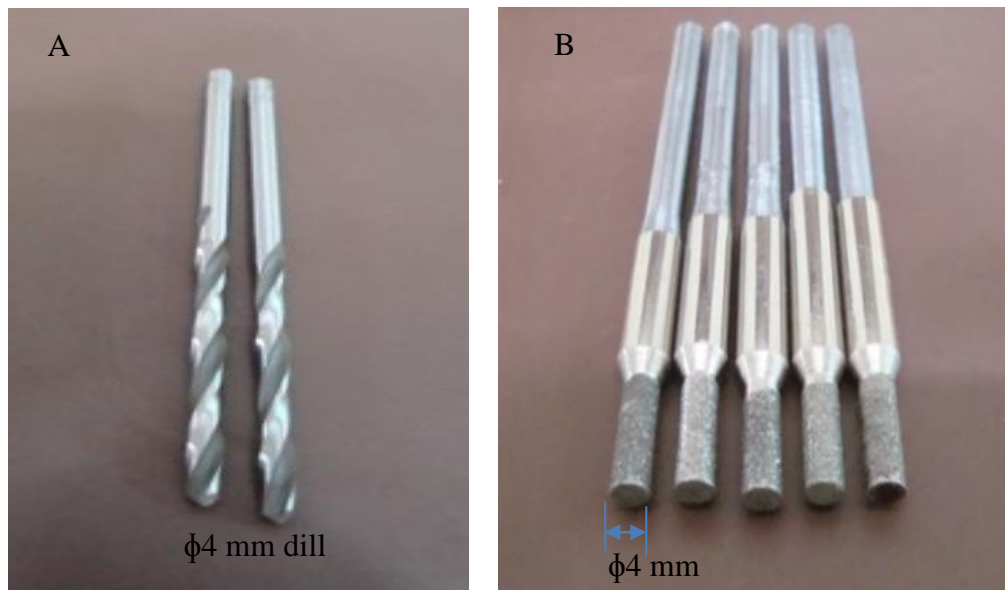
Represent (A) drill bit and (B) abrasive coated tool
